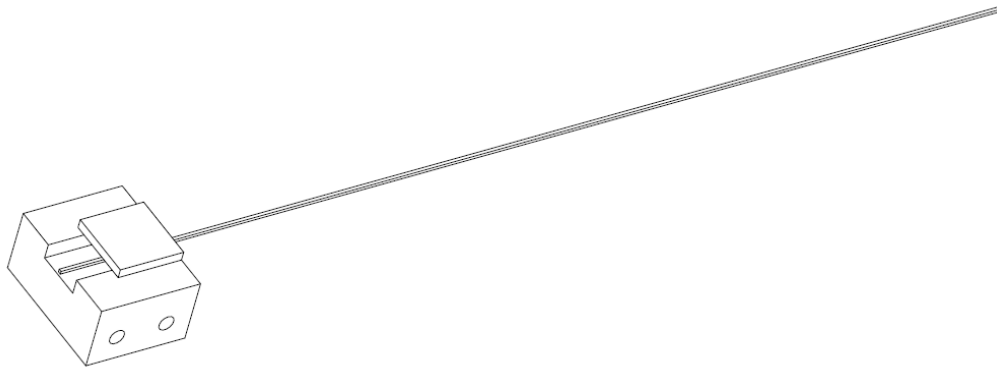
Mounting Whisker-GMR Assembly on Aluminum Base
